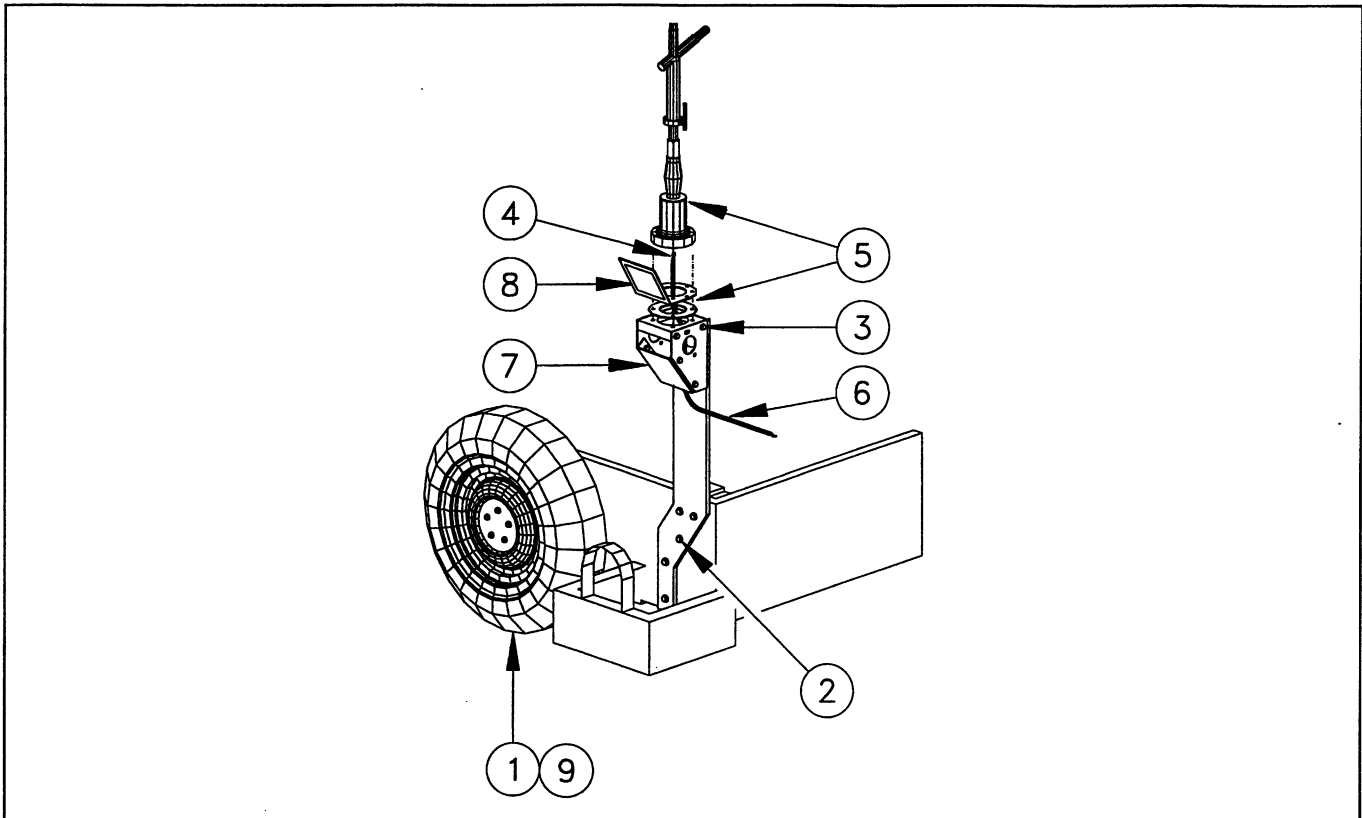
(Sheet 1 of 2) Antenna Cable Assembly
